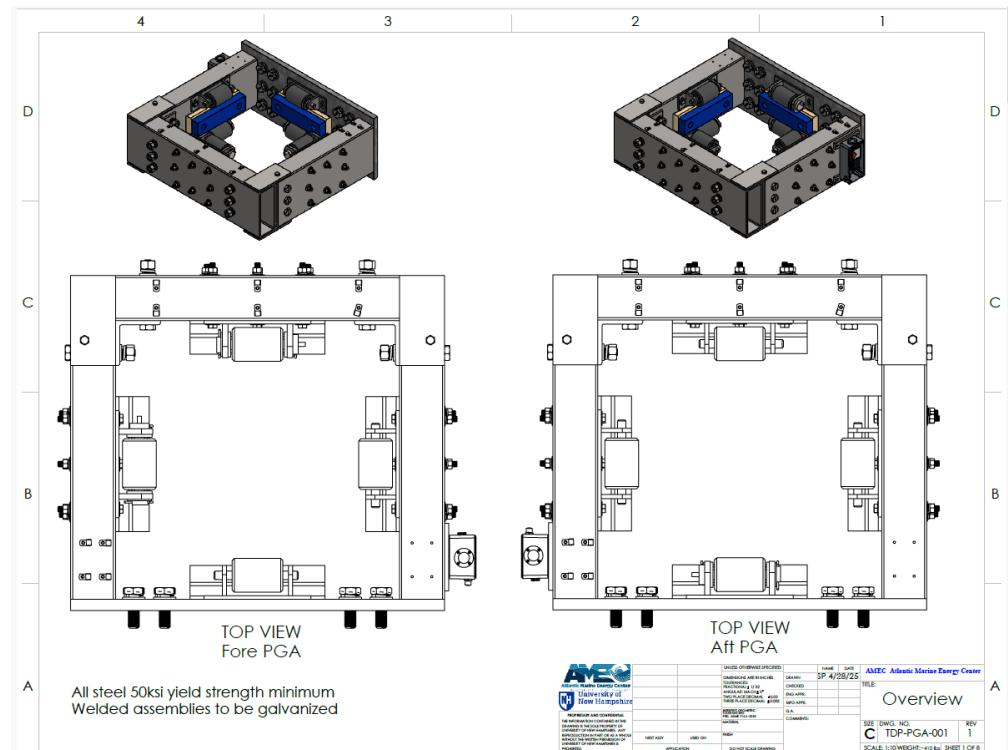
Cover page of preliminary drawing package for new, upgraded Pile Guide Assemblies (PGAs). These upgraded assemblies use heavier duty materials and fasteners to increase assembly strength, and incorporate features to mount the new elevation and load sensors.
